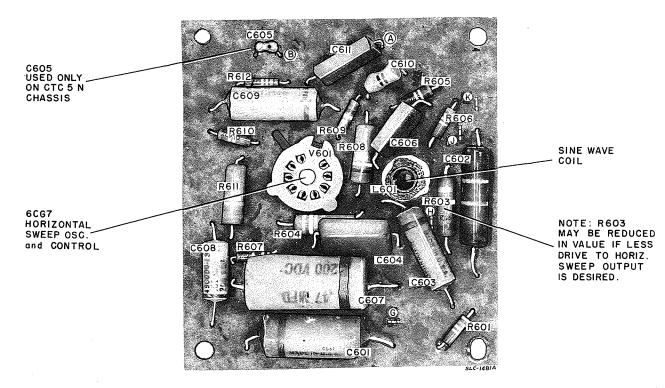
Top View, PW-600, Printed Circuit Board, Horizontal Oscillator and Control Circuits, CTC5, CTC5N.
